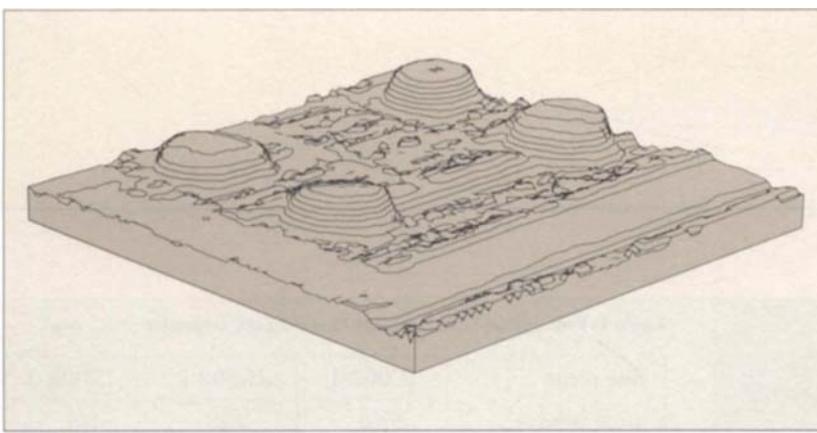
Four solder-paste deposits on a circuit board shown before SM components are in place. The deposits are about 10 mils high, and the field of view is 300×300 mils.
